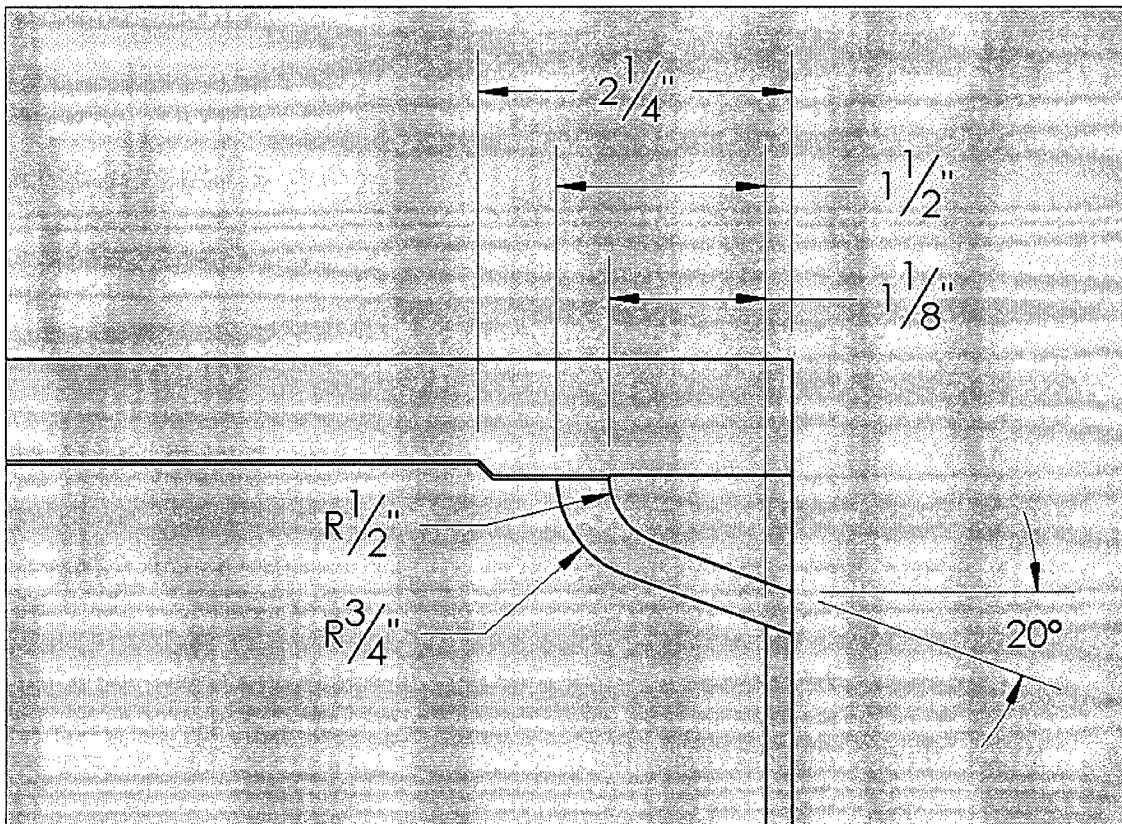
Detail View of Instrument Nozzle Weld Prep [6].
